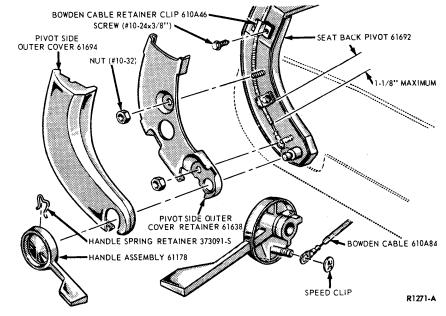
Seat Adjusting Handle and Side Pivot—Disassembled
